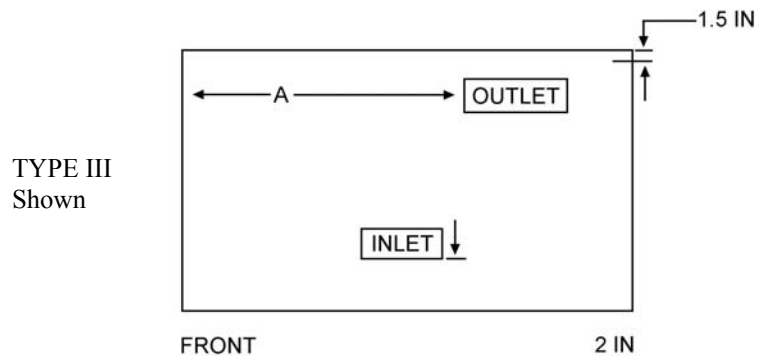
Fan-coil assemblies. (sheet 1 of 4)
